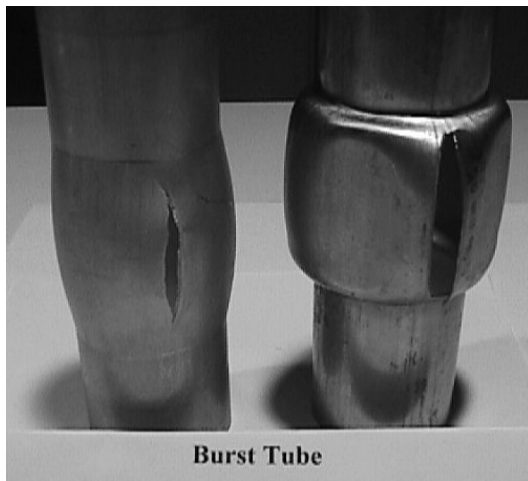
Burst and split tubes due to high levels of internal pressure (seamless Al 6061-T6 tube on the left and welded 304-L stainless steel tube on the right)
